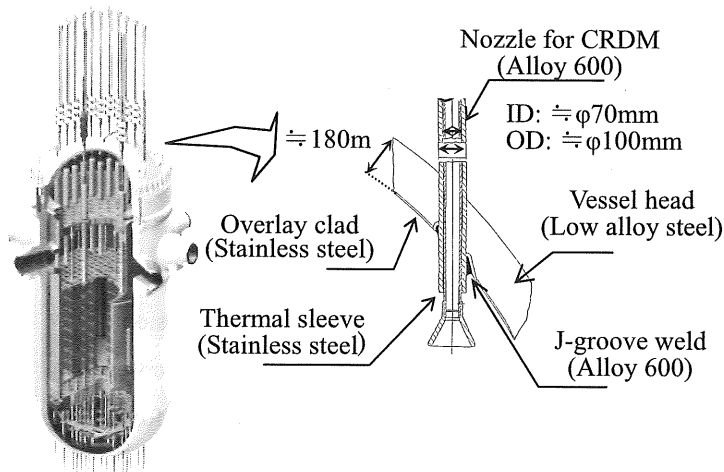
J-weld of reactor vessel head penetration nozzle
